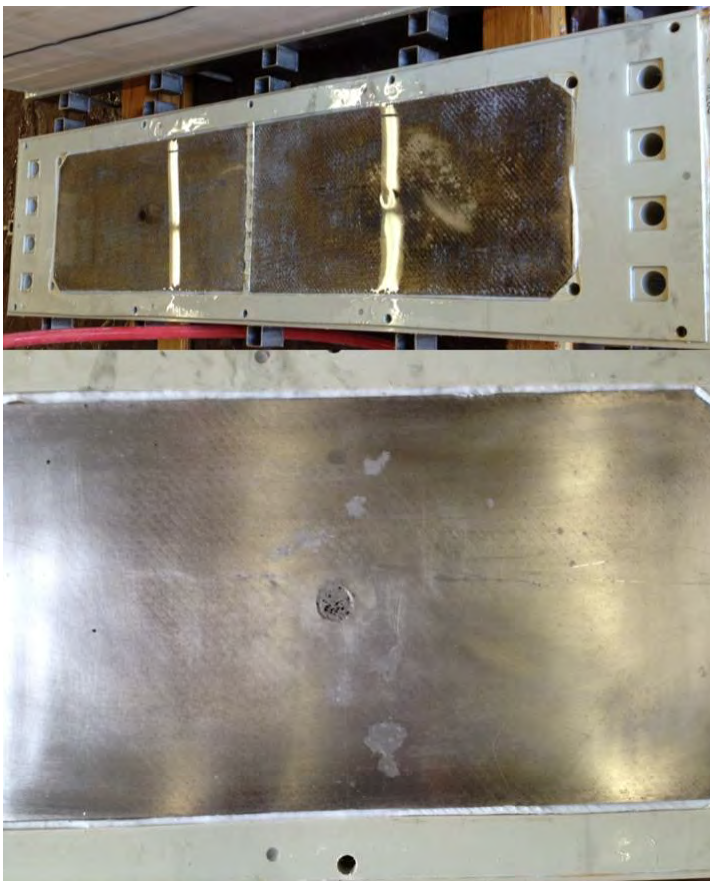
EDM cathode inspection. Photo taken on 9/9/13)
